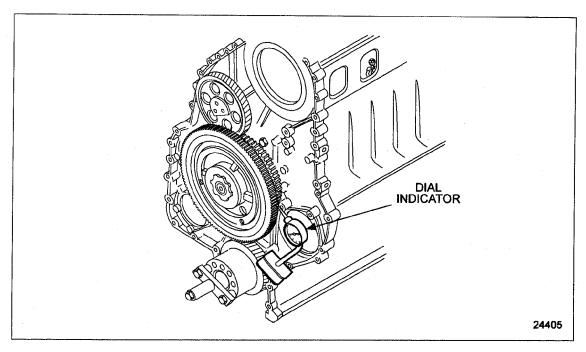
Crankshaft Timing Gear-to-Bull Gear Lash Measurement
